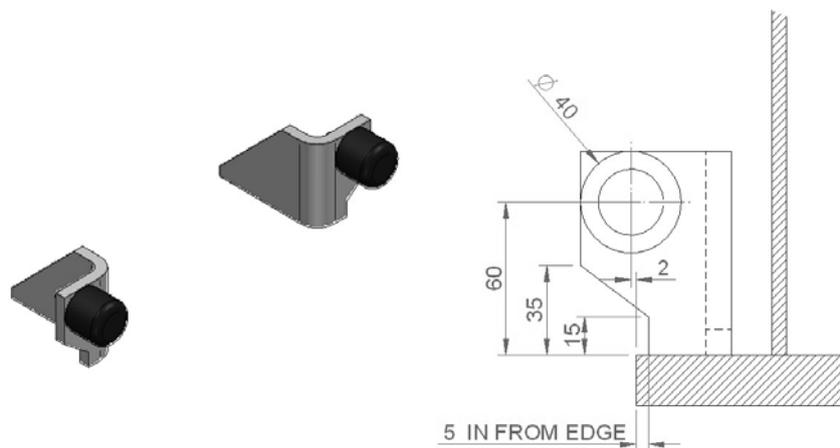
Single Girder 2 & 4 Fall Traverse End Stops
